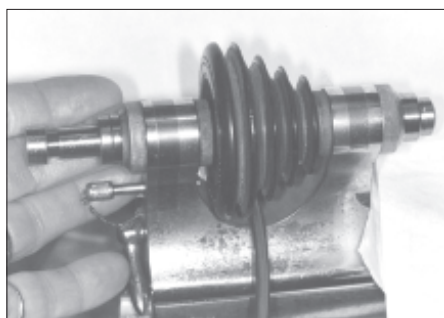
Checking the spindle in the headstock for proper sleeve placement. The sleeve can be moved in or out at this time.
